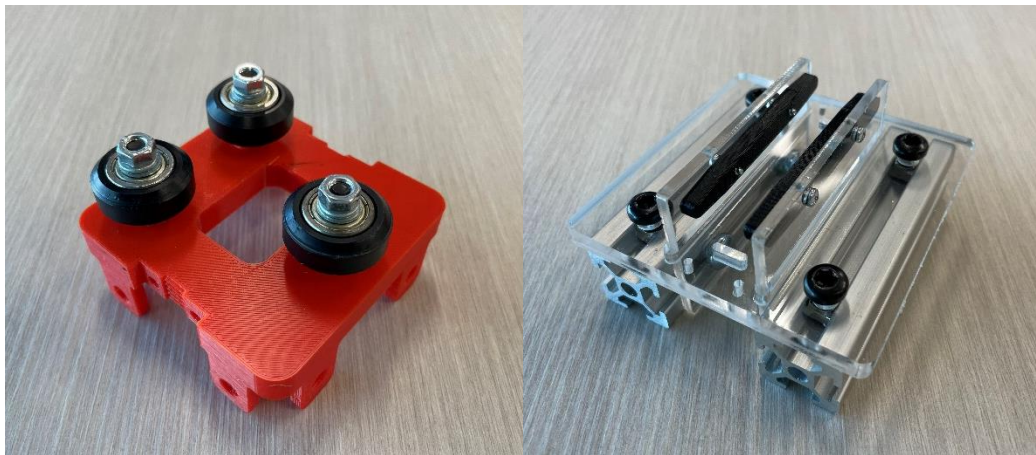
Left: COTS Wheels; Right: 3D Printed Runners
